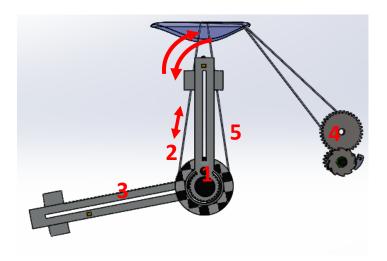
Magnetic pin locker activated: shoulder flexion/extension motion enabled Magnetic pin locker, 2- Upper-arm orthosis part, 3- Forearm orthosis part, 4- Gear 1, 5- Cable
